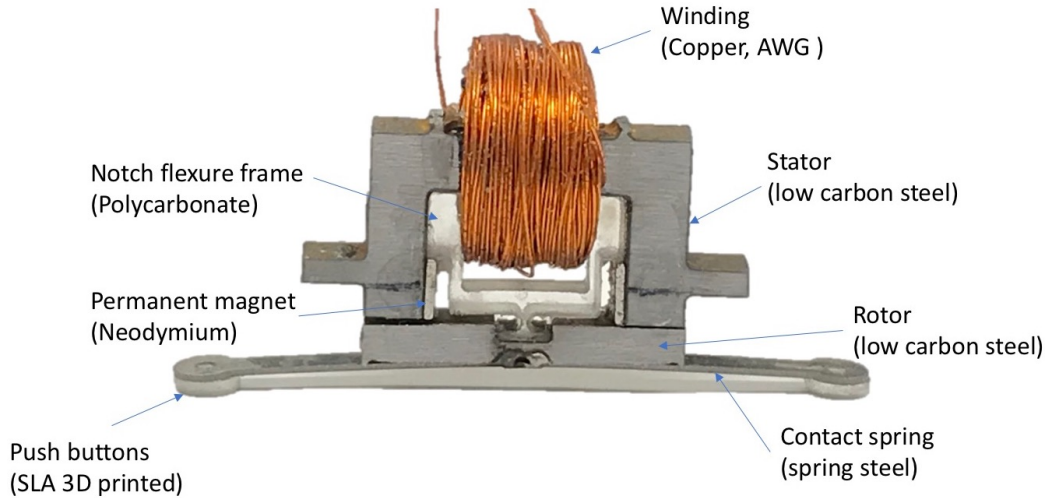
Assembled EM actuator module, including the rotor, notch flexure, contact spring and push-buttons.
